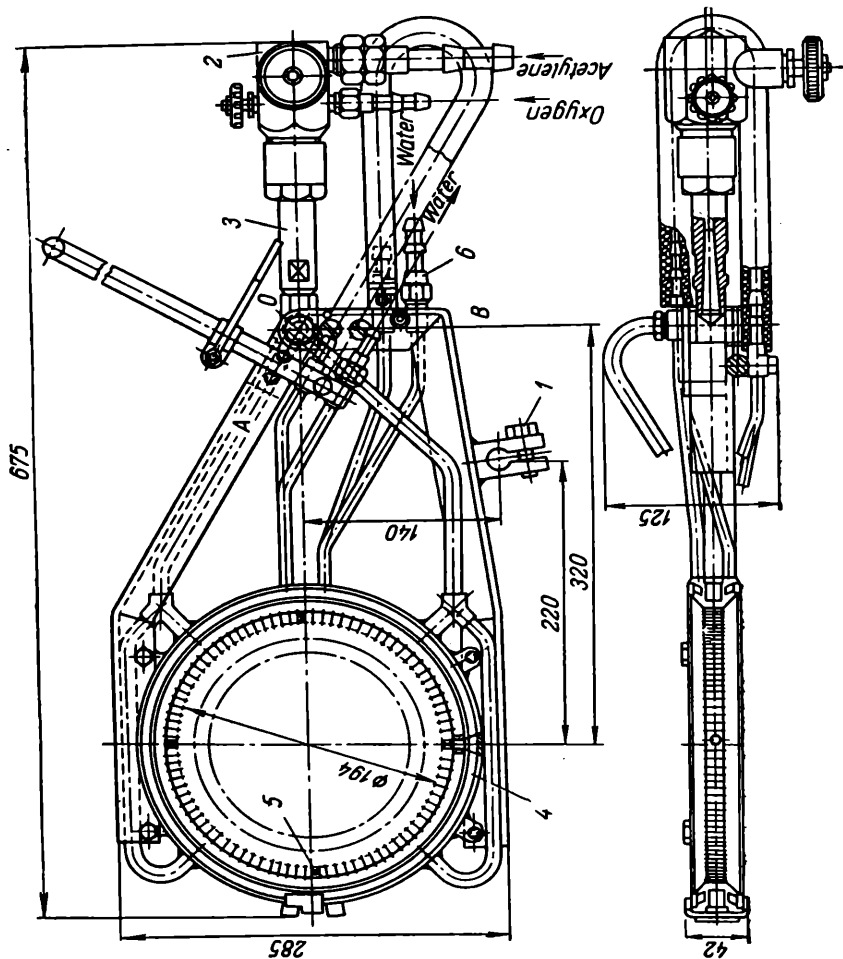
Type MF-50 ring torch for gas-pressure welding;
